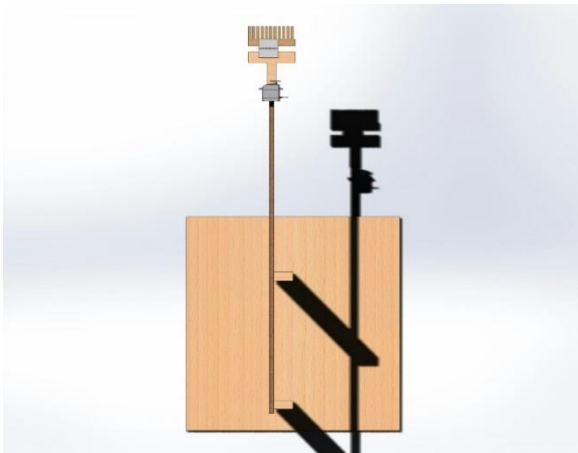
CAD DESIGN: TOP VIEW OF MANUAL BOT
